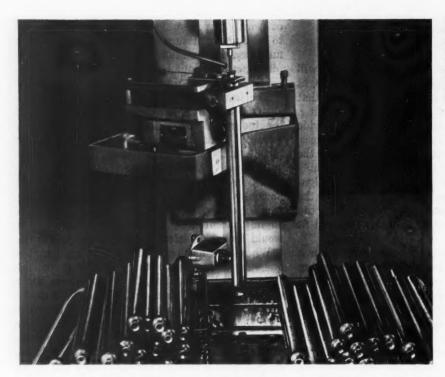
Set-up employed to tap both ends of steel tubes at the rate of 600 parts (1200 tapped holes) per hour. A micro switch permits the loading of a work-piece to actuate the air clamping vise and to start the tapping cycle.
